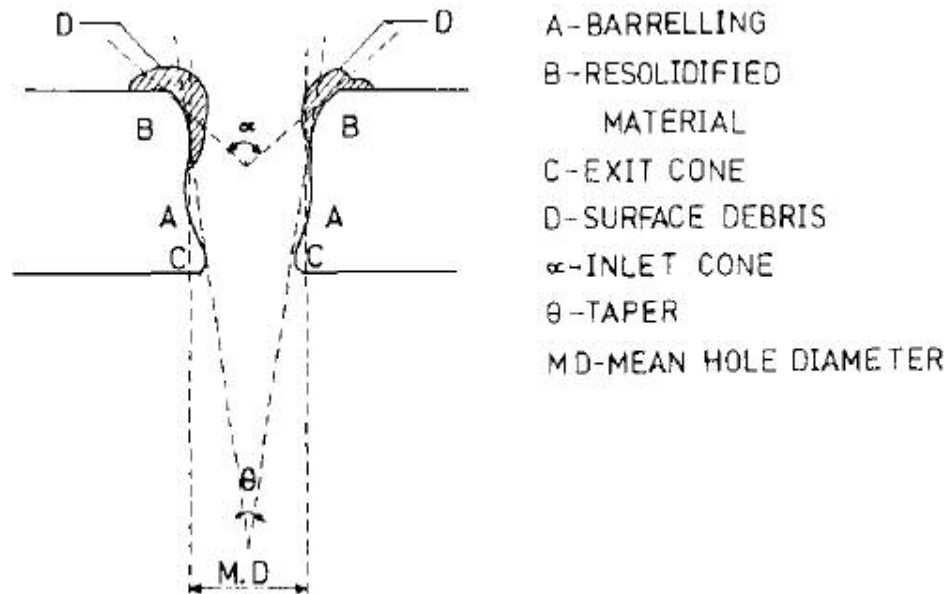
Salient geometrical features of laser-drilled holes [14]
